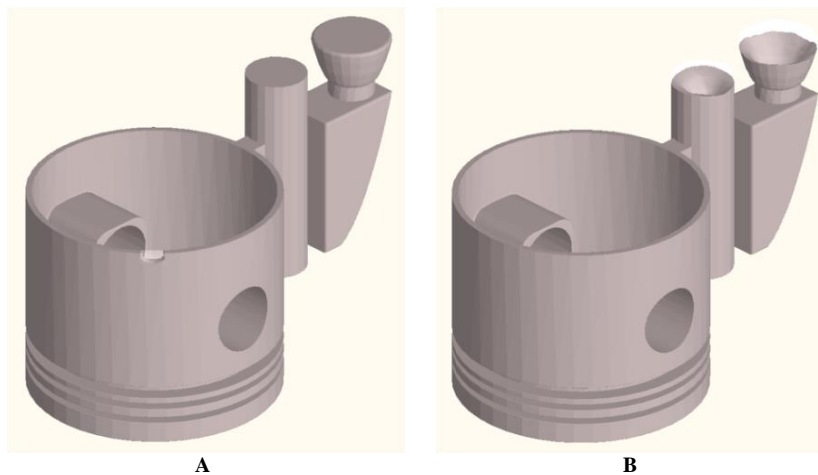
The metal mold casting at changing of the casting orientation: A – grey cast iron EN-GJL-300, B – aluminium alloy A356.
